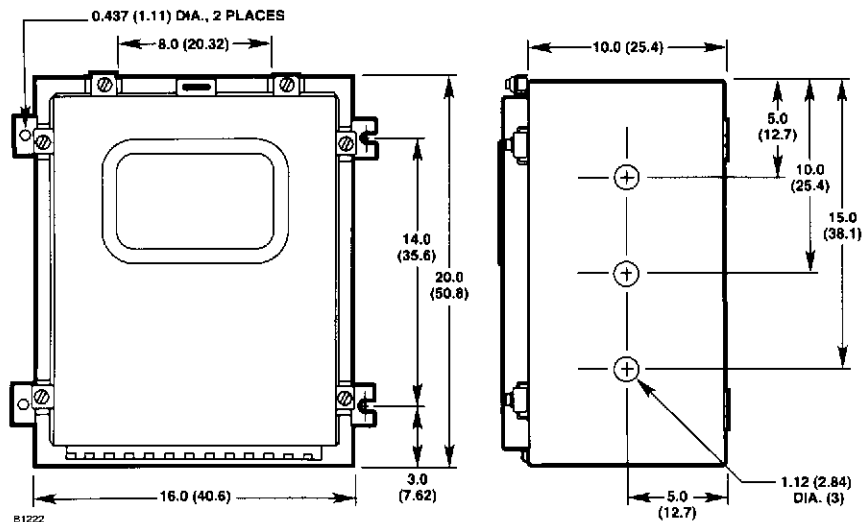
NEMA 4 Multi-Unit Wall Mount Housing Dimensions in Inches (Centimeters)
